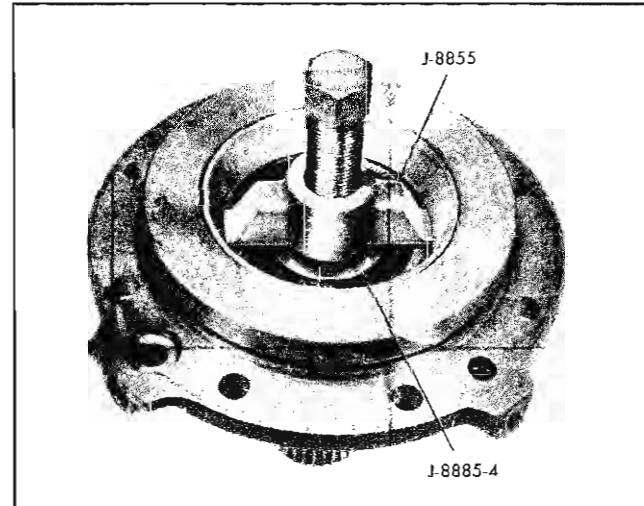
Removing Rear Pinion Bearing Outer Race
